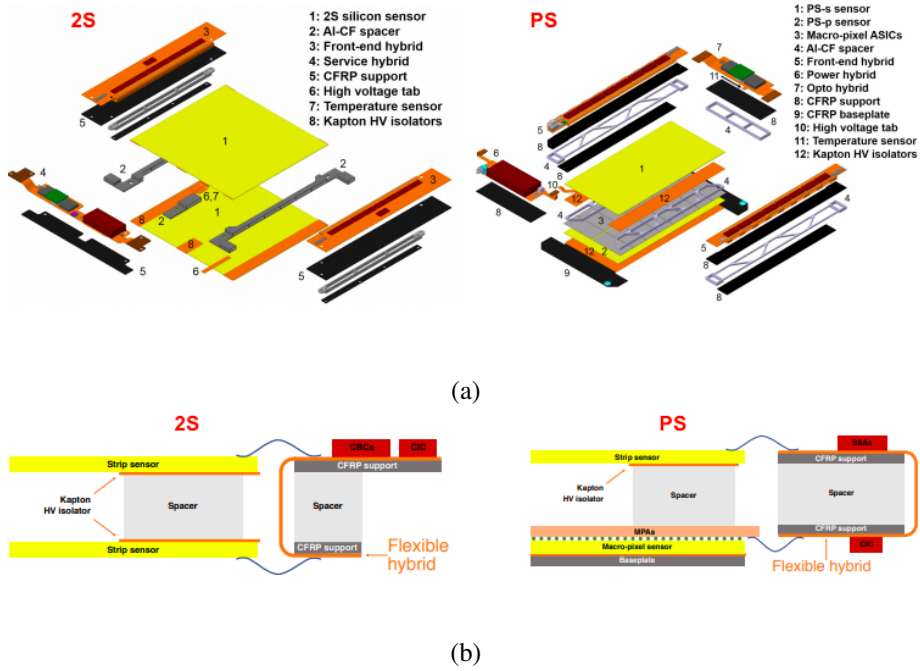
Exploded (TOP) and transversal cut (BOTTOM) of a 2S and PS module.
